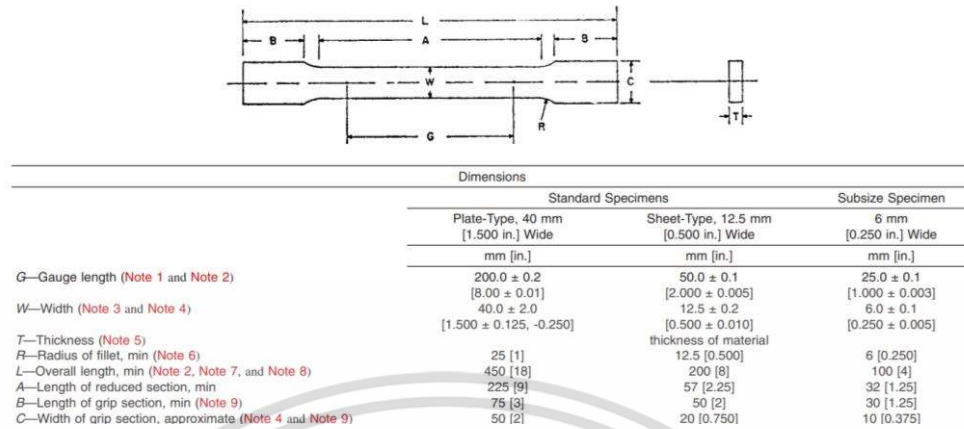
Plate type and sheet type specimen dimensions [10].
